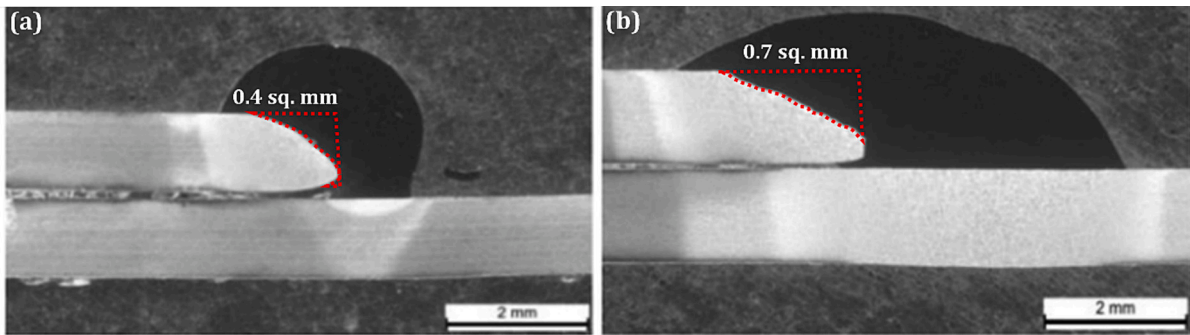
Cross-sectional macrographs of the deposited bead showing loss of base metal (a) 52 and (b) 123 J/mm [69].
